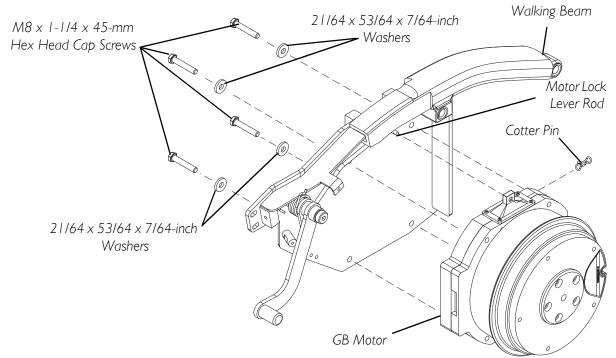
REMOVING/INSTALLING THE GB MOTOR
